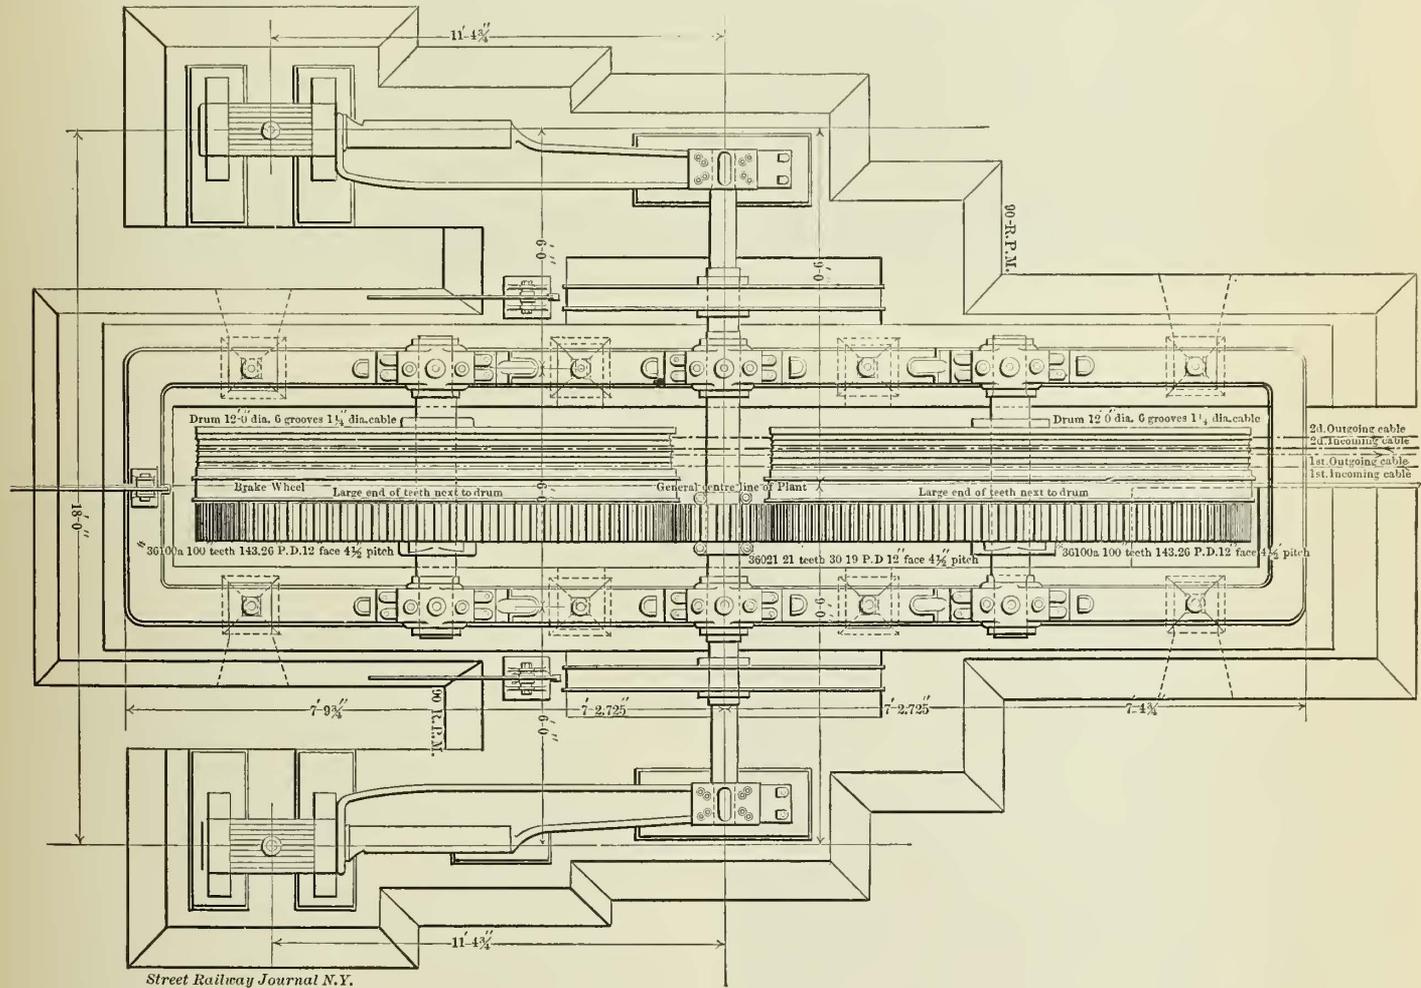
PLAN OF DRIVING MACHINERY—OTIS ELEVATING RAILWAY.
